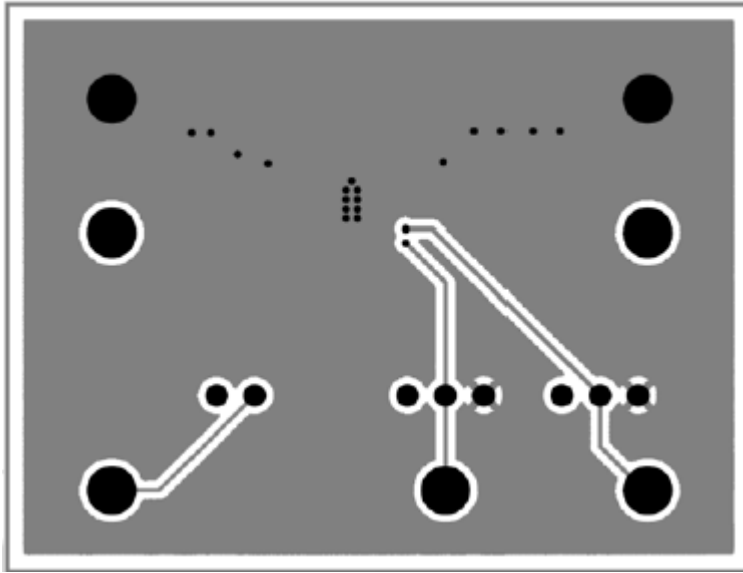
BOTTOM LAYER OF ISL97702 BOOST DEMO BOARD
